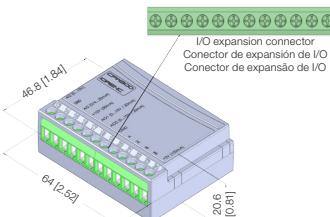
CFW300-IOAENC dimensions in mm [in] and connectors location
